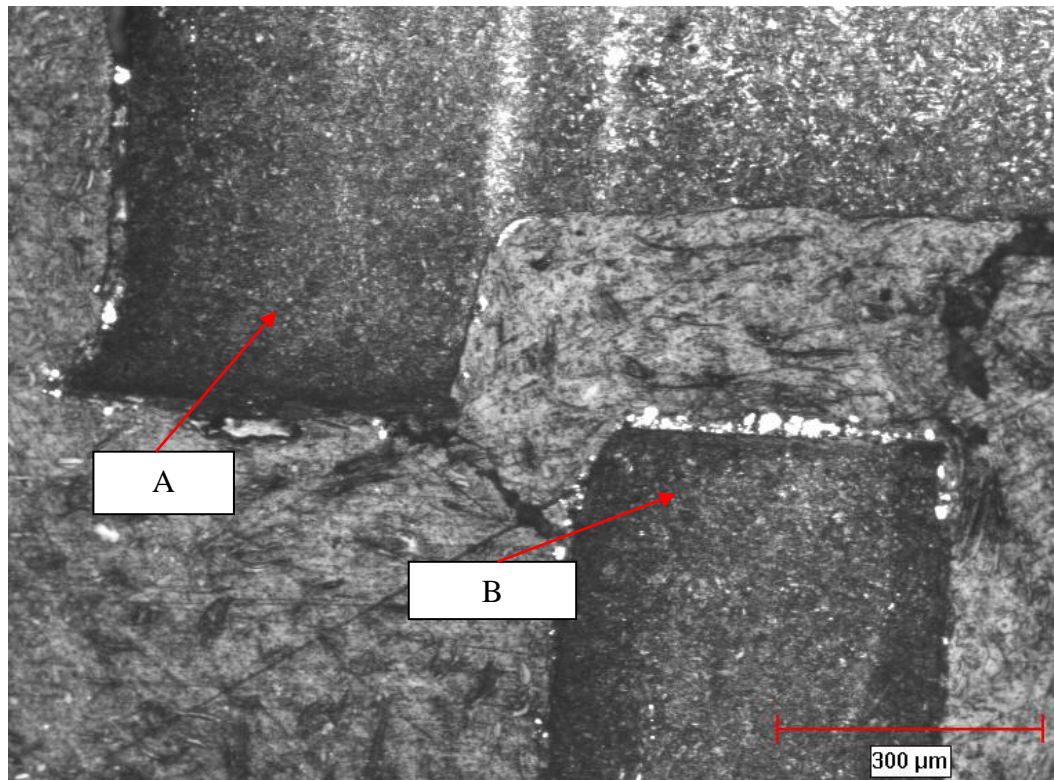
Mars 300 specimen (9) showing fracture. Sections A and B are fractured segments of the thin-walled tube specimen
